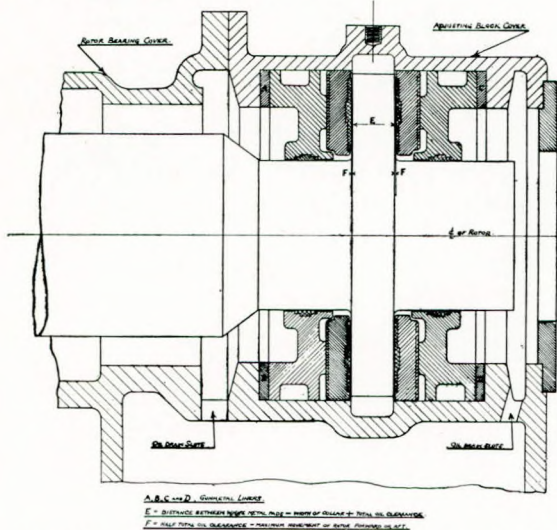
Adjusting block for turbines not fitted with end-tightened blading.
